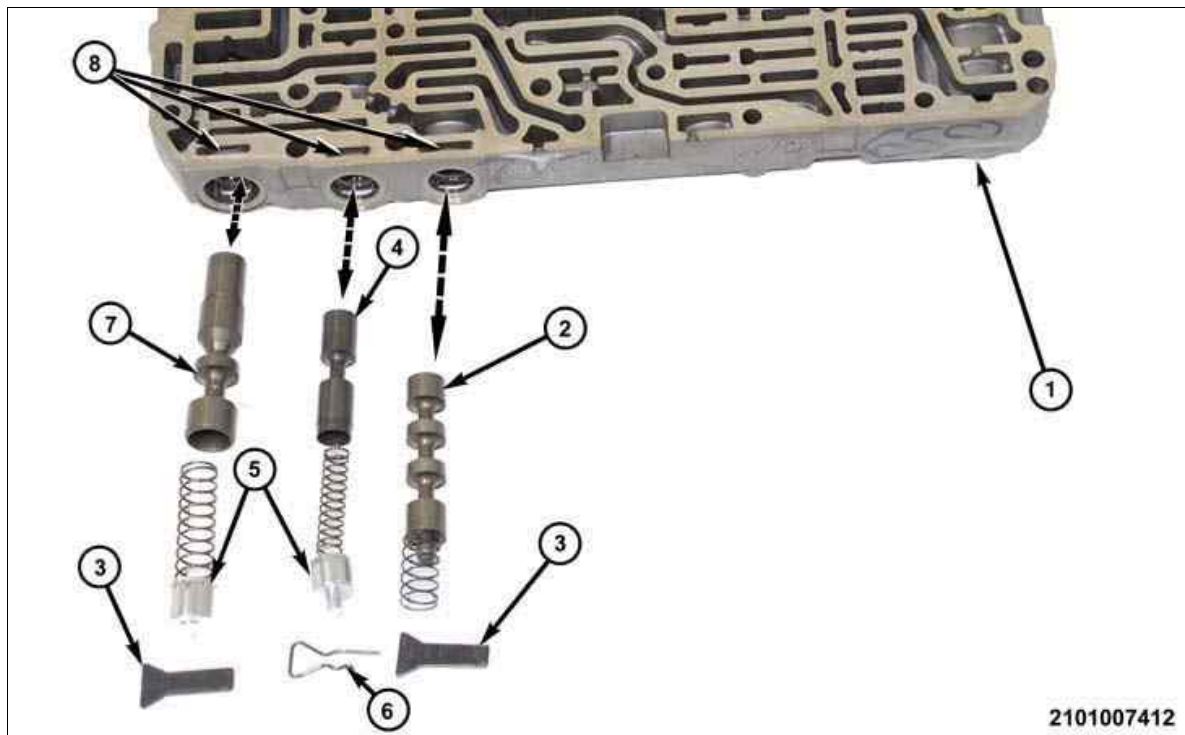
Inner Valve Body With The Valves Bores Facing Up
